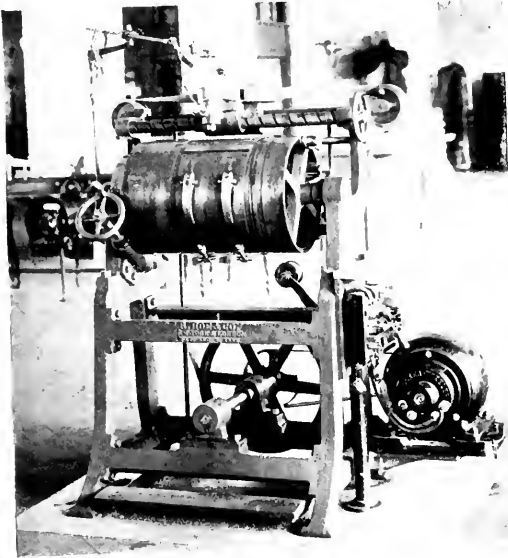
CARD-ROUTING MACHINE, MOTOR-DRIVEN.
